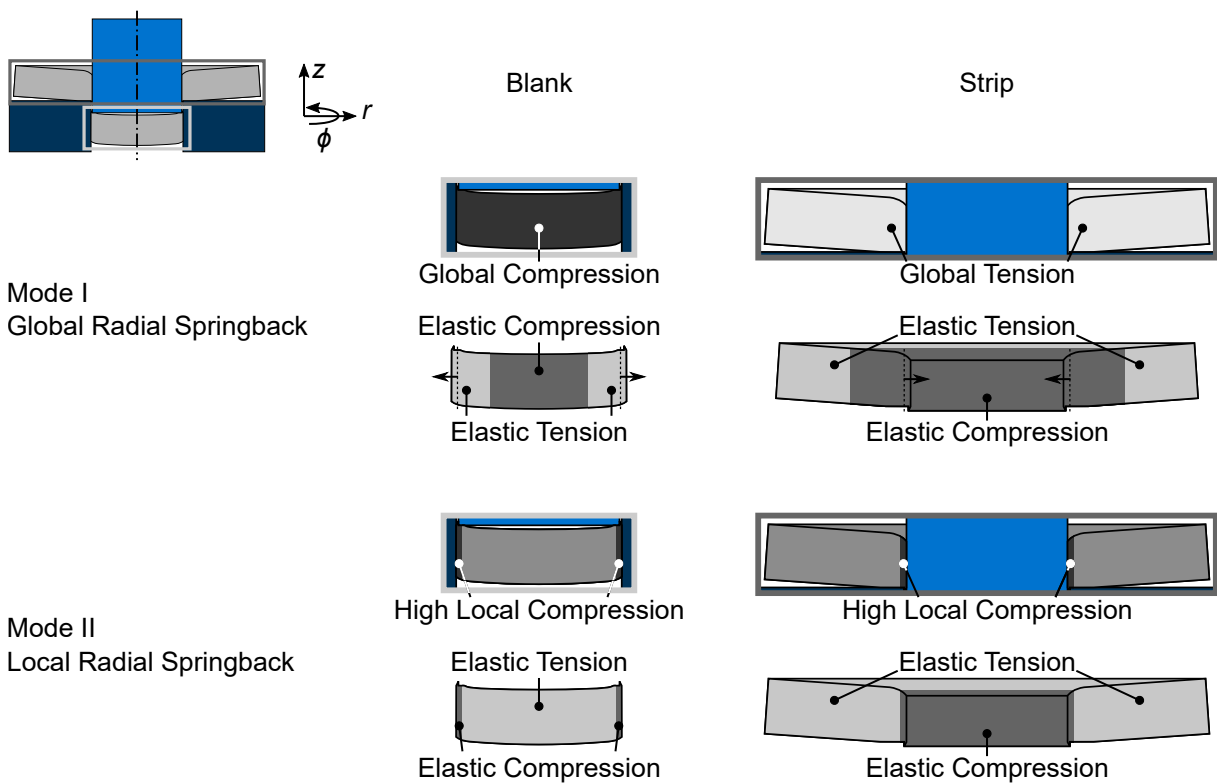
Global and local springback modes in radial direction of parts produced by a rotation-symmetric closed cut without the formation of a fracture zone.
